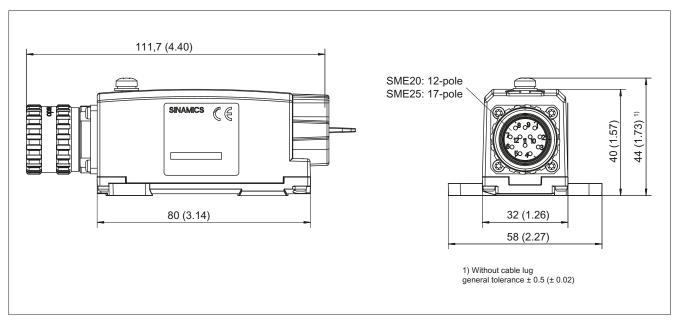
Dimension drawing of Sensor Module External SME20, all data in mm and (inches), order number 6SL3055-0AA00-5EA3
